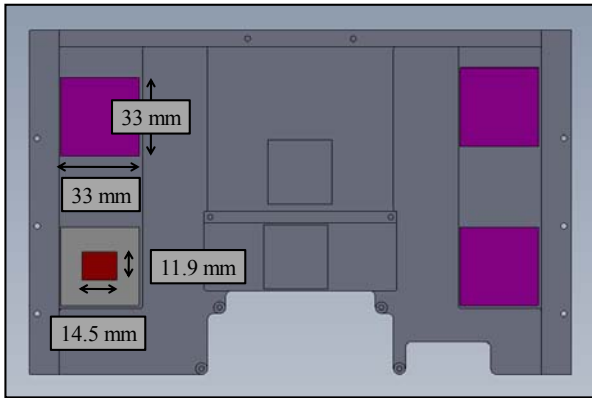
Micro electronics layout showing the component footprint and the actual heat generation area mounted on a heat spreader
